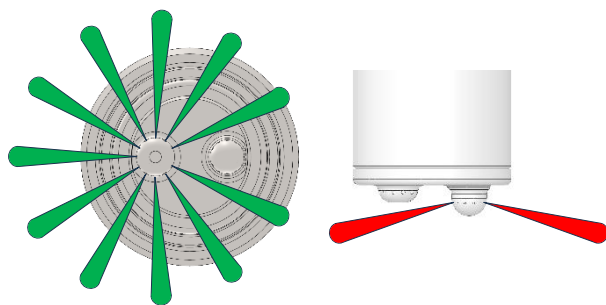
Detail of the dual fuel nozzle, showing the arrangement that prevents impingement of the other nozzle tip during injection: (left) wider gap between two jets in the methanol spray pattern, (right) further protrusion of the diesel nozzle tip.
